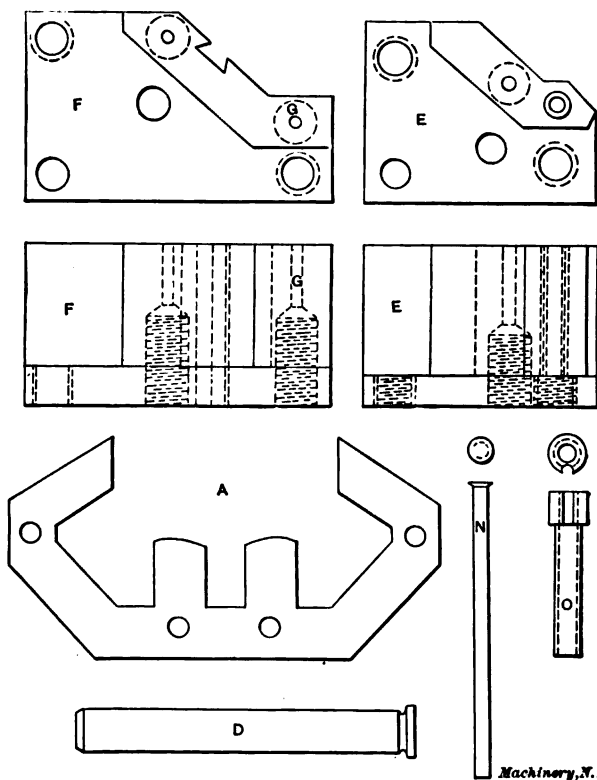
Details of Sub-press Die in Figs. 24 and 25
